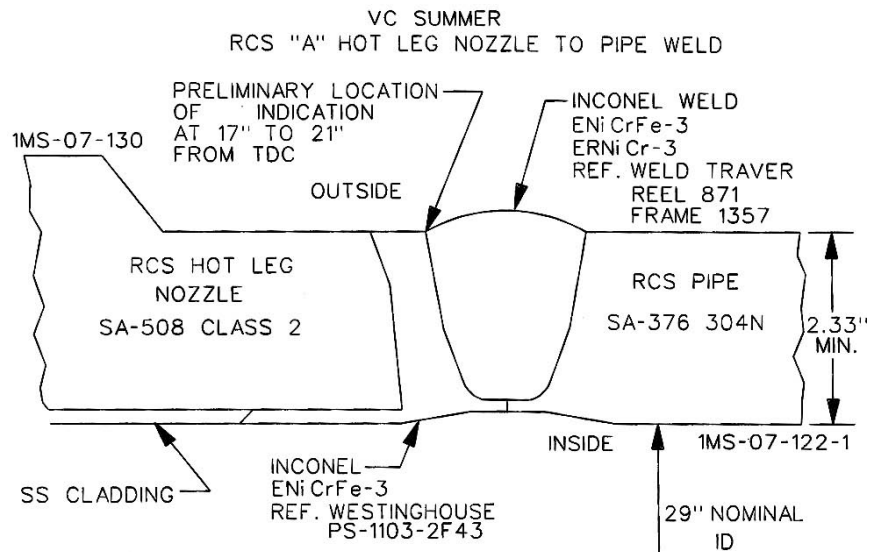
Schematic diagram of the V.C. Summer hot-leg nozzle-to-pipe weld in the reactor coolant system.
